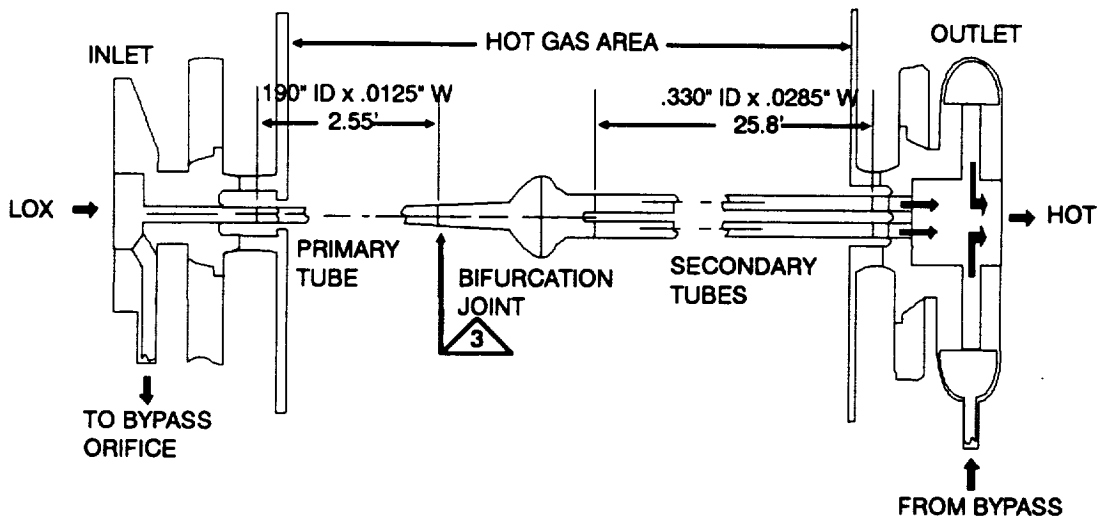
Detail of the HPOTP Heat Exchanger Coil Near Weld 3
